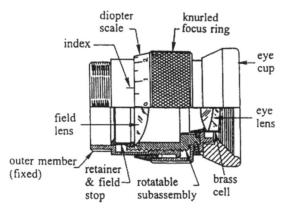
A simple focusing eyepiece in which the lens cell rotates on a coarse thread. (Adapted from Horne.¹⁷)
